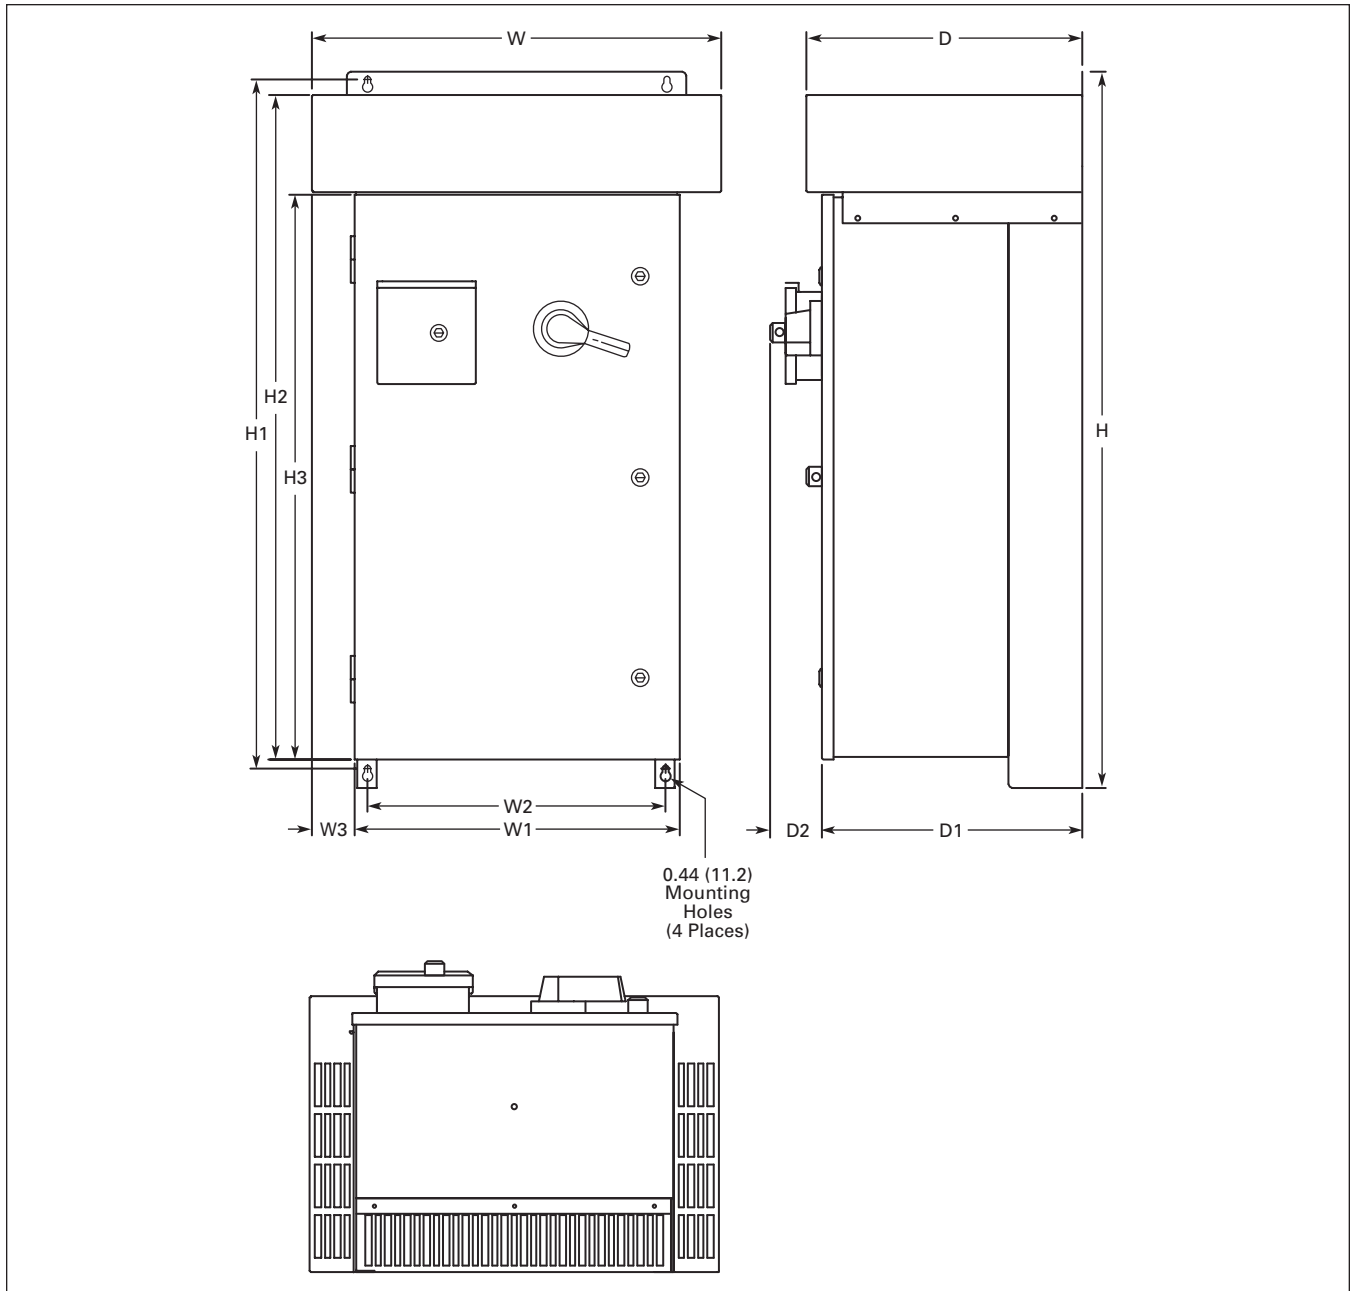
Enclosure Size B—UL Type 3R—Approximate Dimensions in Inches (mm)
